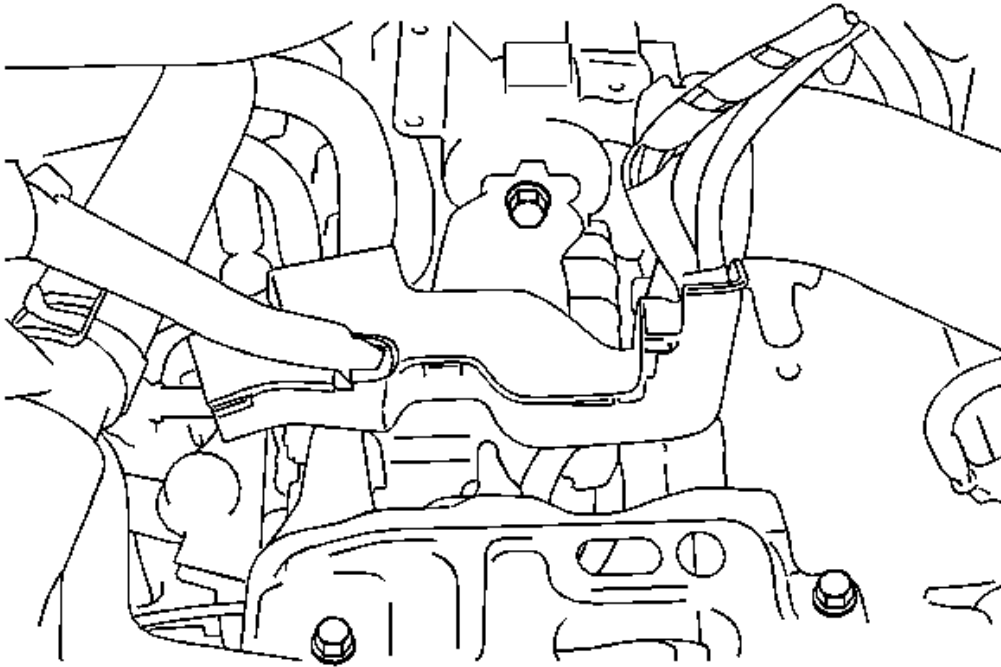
Identifying Wire Harness Clamps At Battery Carrier
